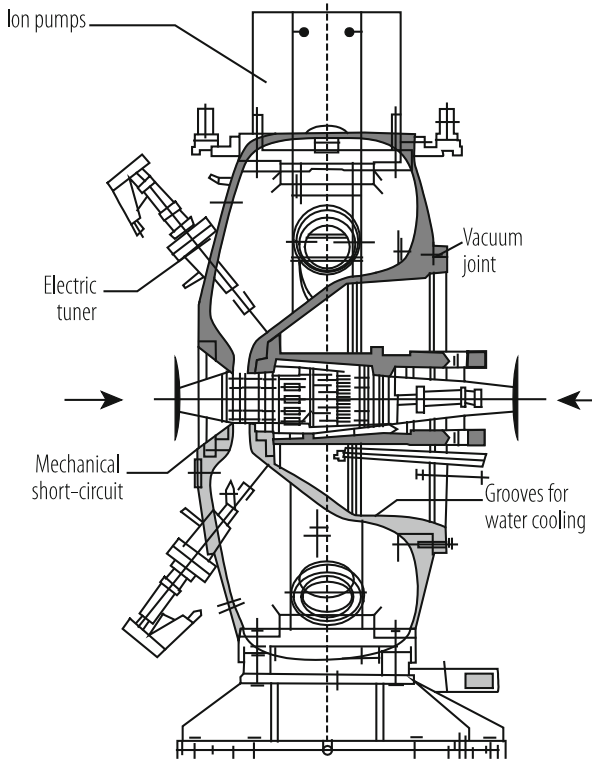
CERN PS 80 MHz cavity, assembly drawing
